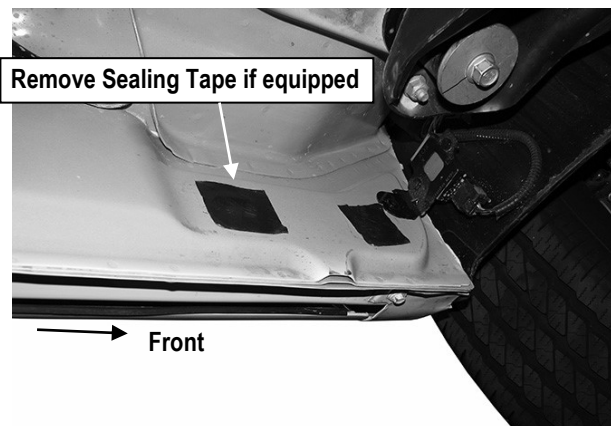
Driver Center Mounting Bracket (DCM+DRS) Assembly
